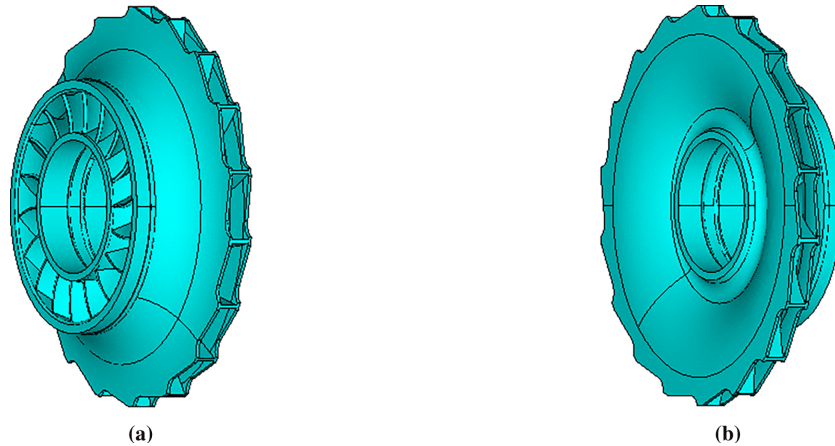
3D model of impeller: (a)–view from the cover disc side, (b)–view from the main disc side.
